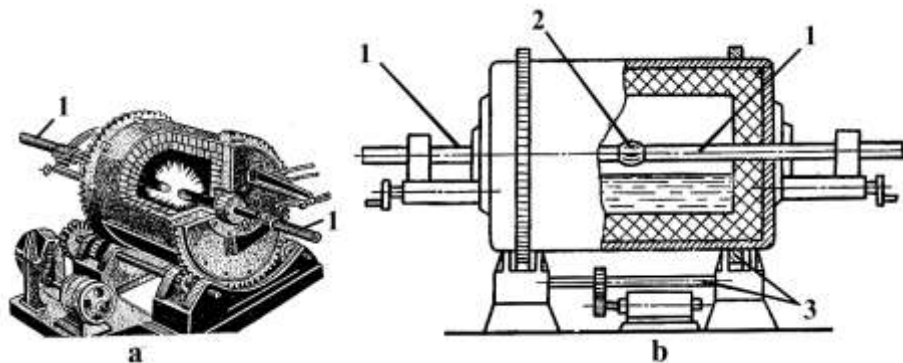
Electric arc furnace of indirect heating a – drawing; b - scheme: 1 – electrode; 2 – electric arc; 3 – tilting mechanism
